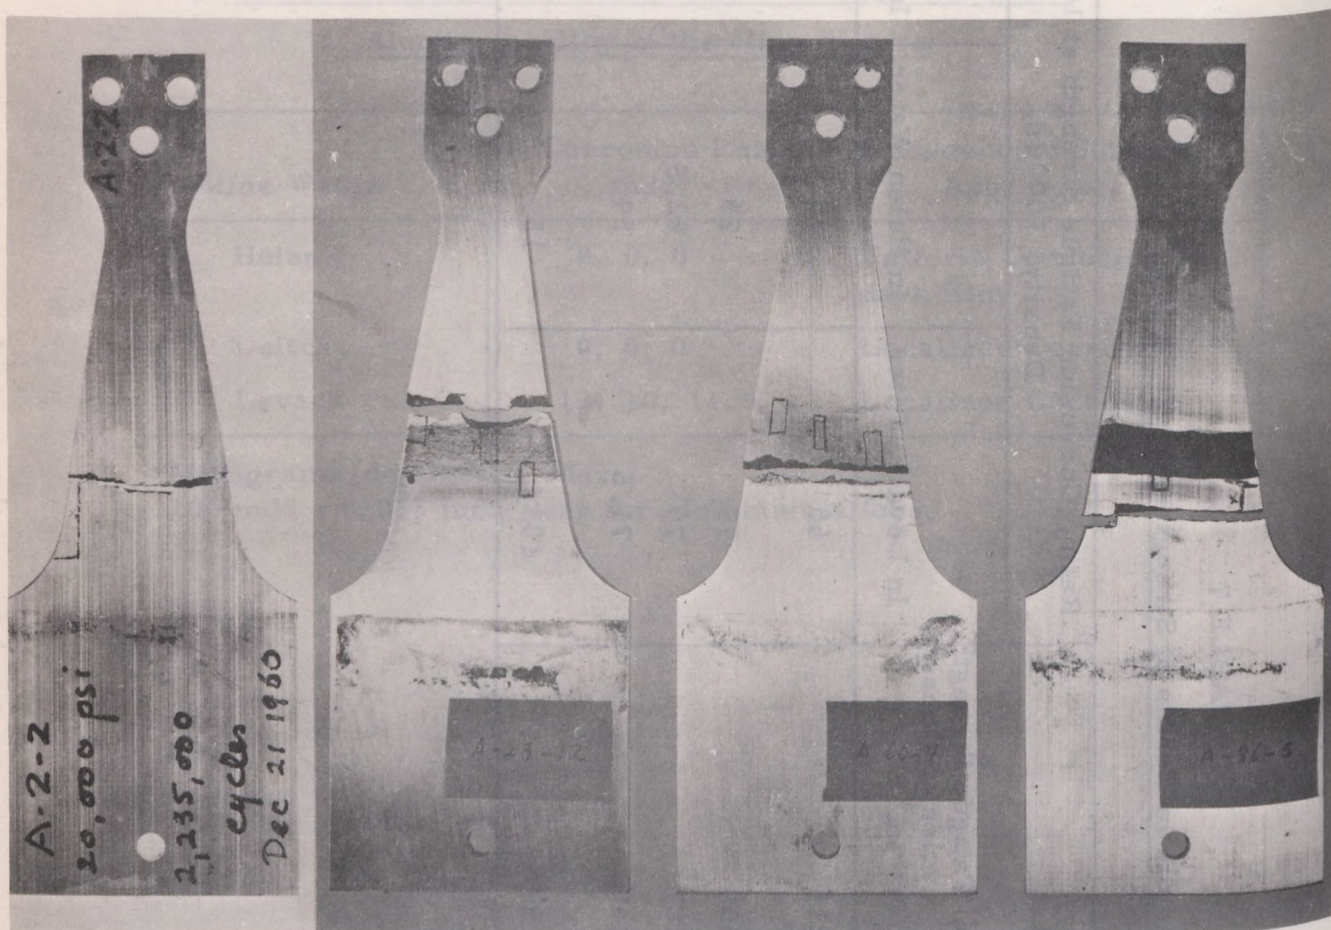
ASTM 6061-T6 aluminum alloy fatigue and corrosion fatigue specimens after testing.
